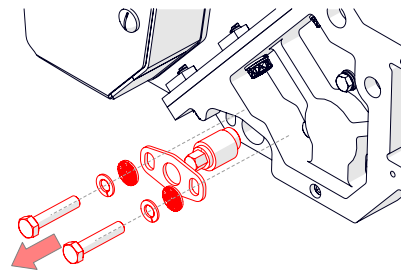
J - Remove the RH 2 x shear blade bolts and cam
